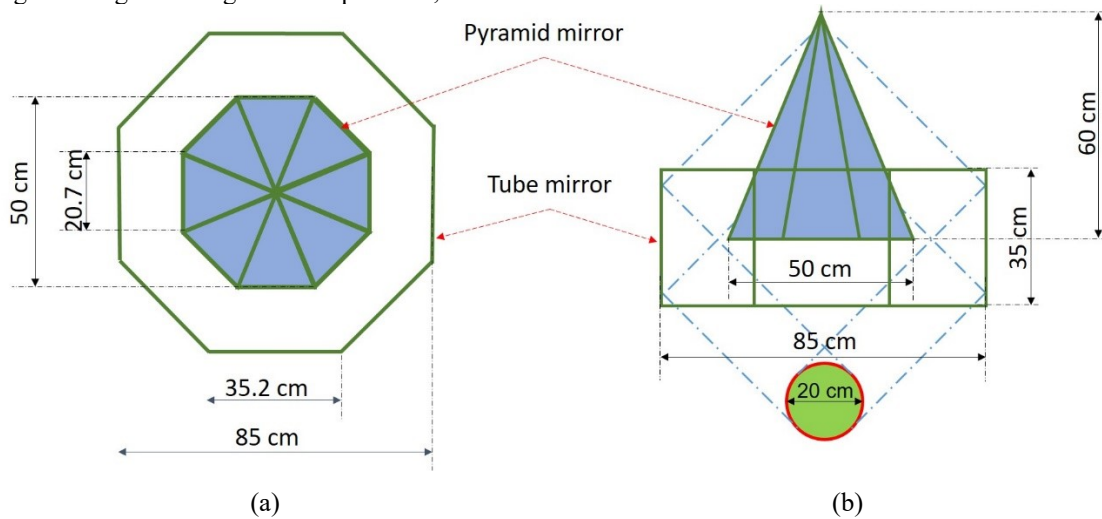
The dimensions and arrangement of the proposed pyramid and tube mirrors: (a) top view and (b) side view
